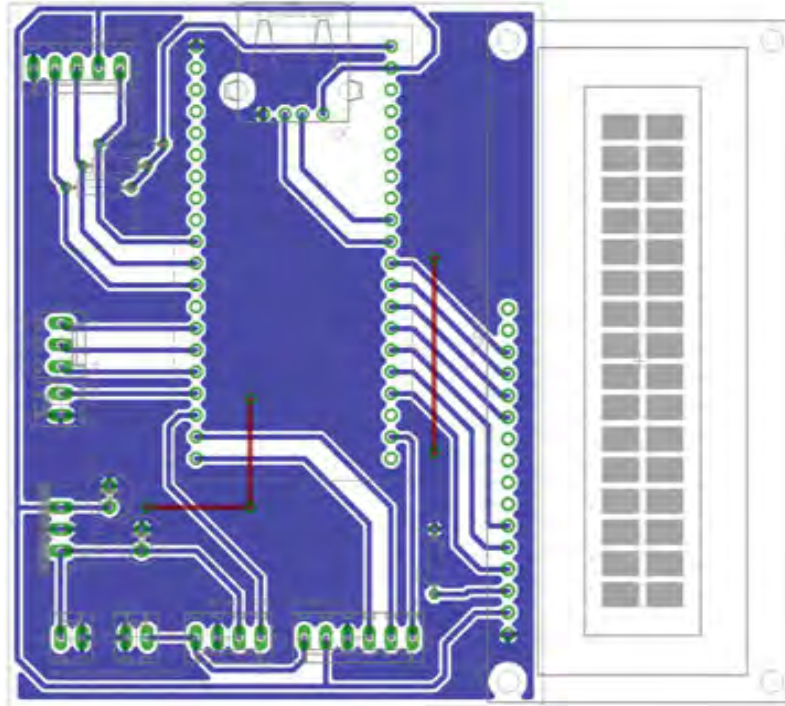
PCB layout (Eagle CAD) of MBED interface board for hand device control processing.
